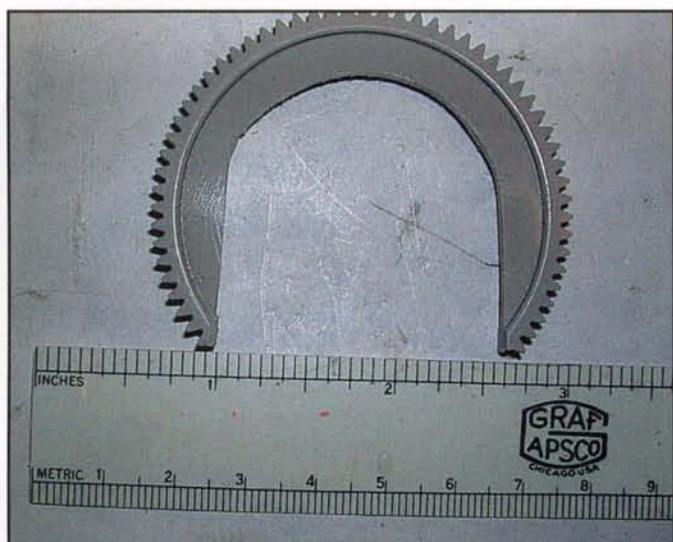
The large gear completed and ready to be installed on the EL rotator collar.
